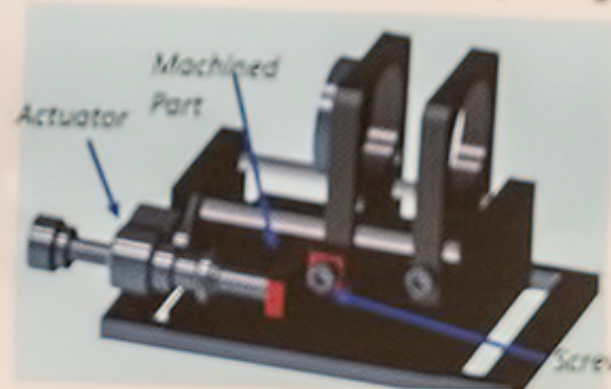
A machined part is attached to the lens and held together by a screw. This machined part is mounted to the actuator which moves the lens accordingly. This simple design accomplishes most of the design goals.
